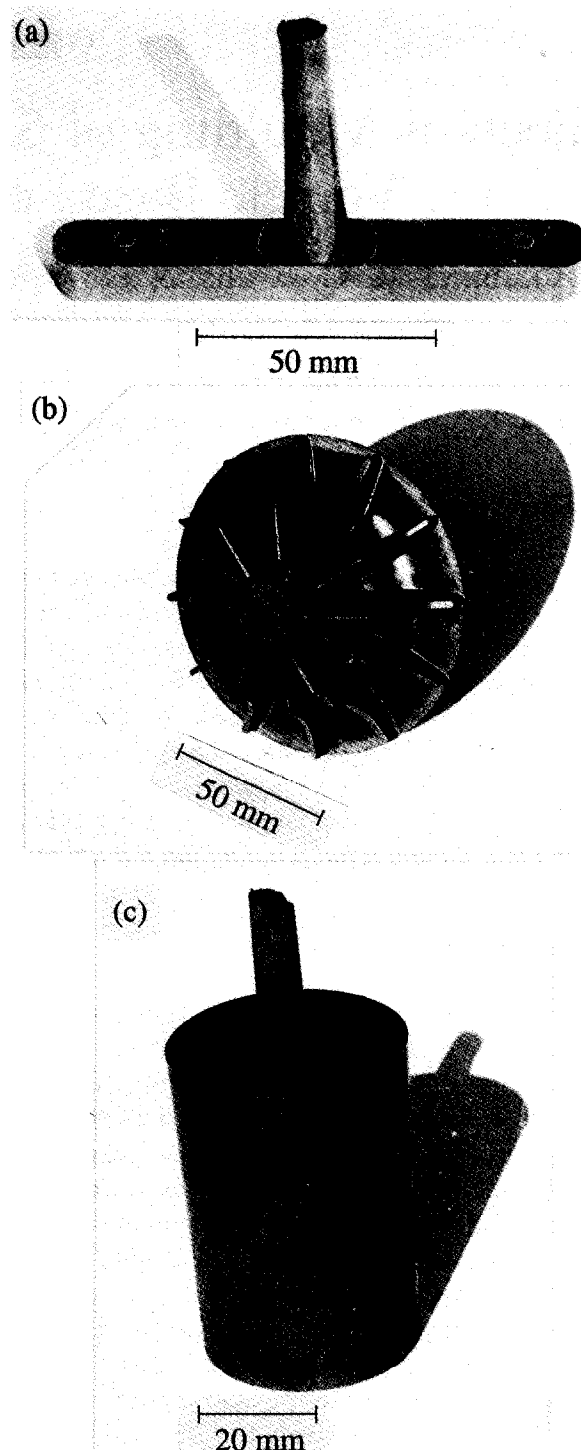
Injection moulded components: (a) centre-gated rectangular bar, (b) straight-bladed rotor, (c) cylinder.
